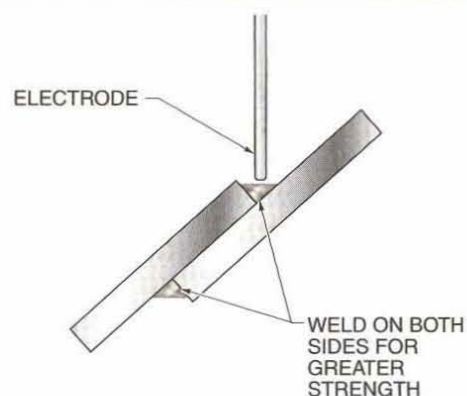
A lap joint typically does not require edge preparation before welding. Welding both sides of the lap joint provides greater strength.
